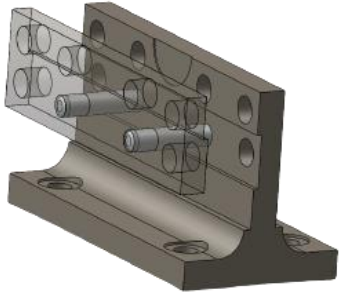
Fixing device for specimens of orthogonal cutting tests.
